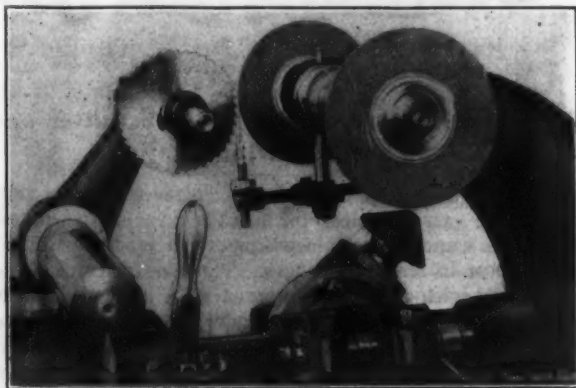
Showing a Slitting Saw on the Bar and the Sliding Head Swivelled to Grind a Bevel Mill.
